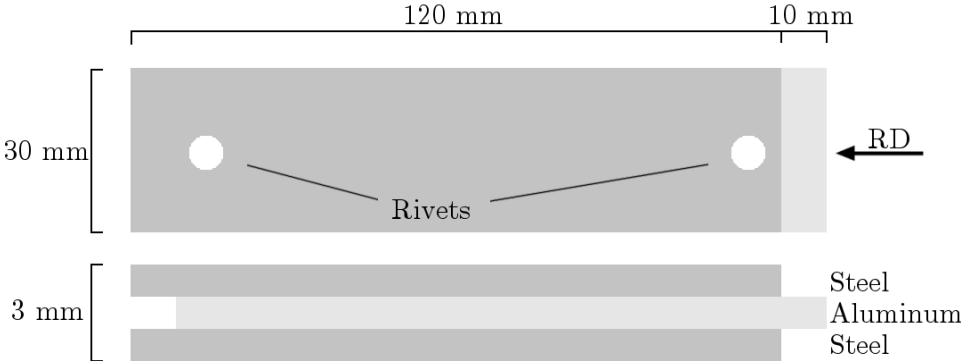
Top and side view of a CRB sample consisting of three sheets, each with a thickness of approximately 1 mm. The aluminum sheet is offset to the front of the sample to allow the rolling mill to grip it more easily. The location of rivets can be seen from the top view.
